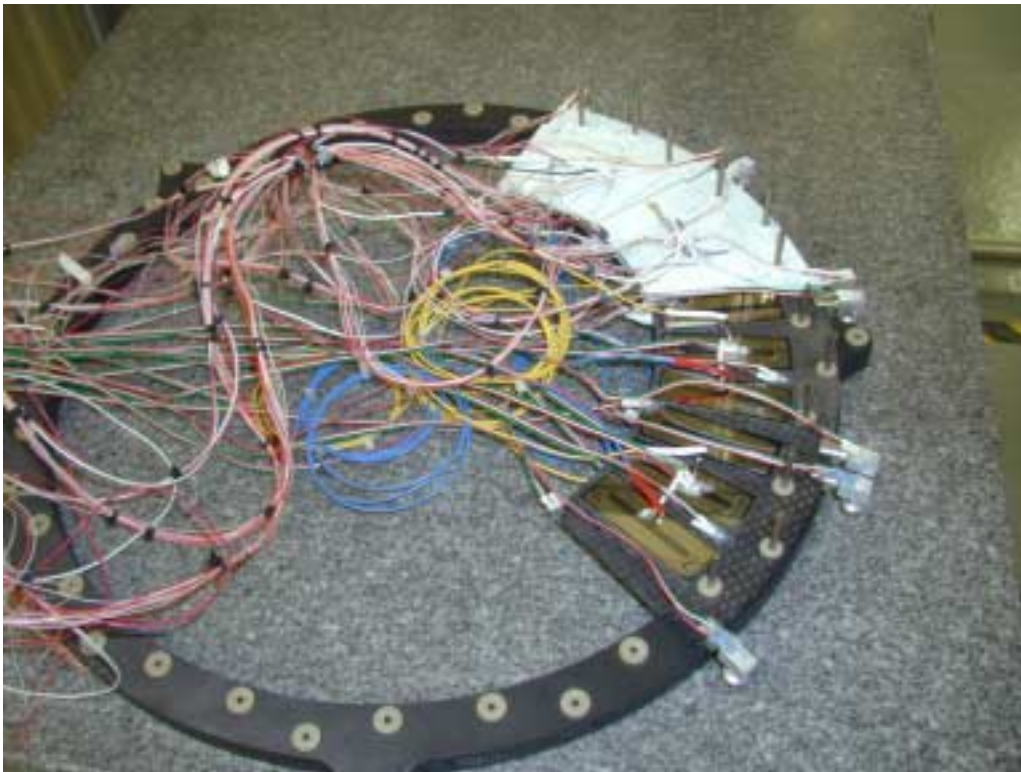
Second prototype disk using sealed-tube sectors under assembly at HYTEC, Inc.
